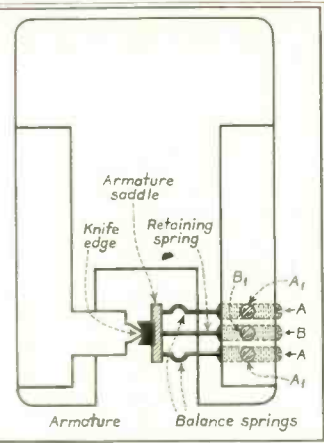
REAR VIEW OF THE NEW CUTTER SHOWING ARMATURE MOUNTING.
